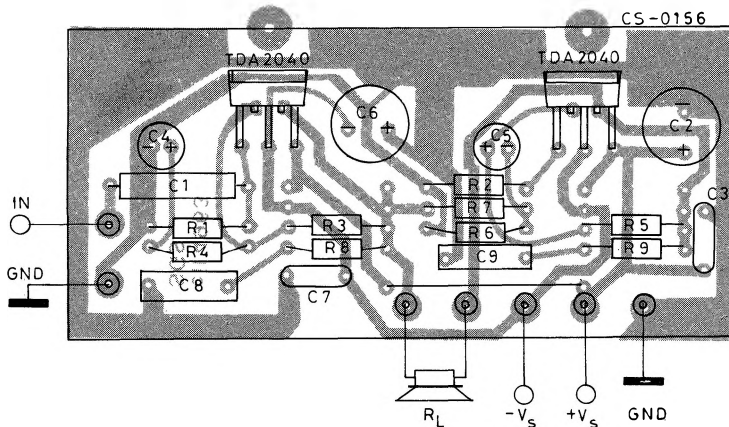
P.C. board and components layout for the circuit of fig. 5.
